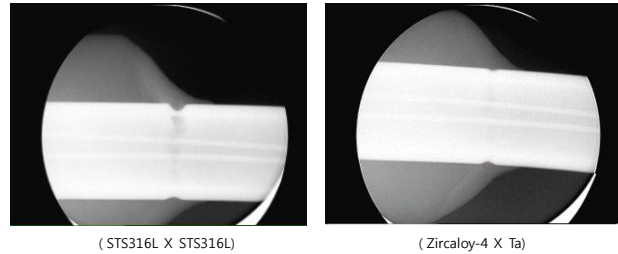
RT images of the STS/STS and Zr-4/Ta welded specimens.
